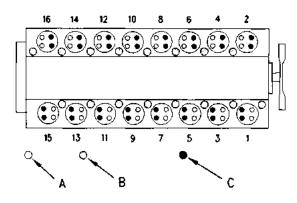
G3616 Engine Design (A) Inlet. (B) Gas admission. (C) Exhaust.
